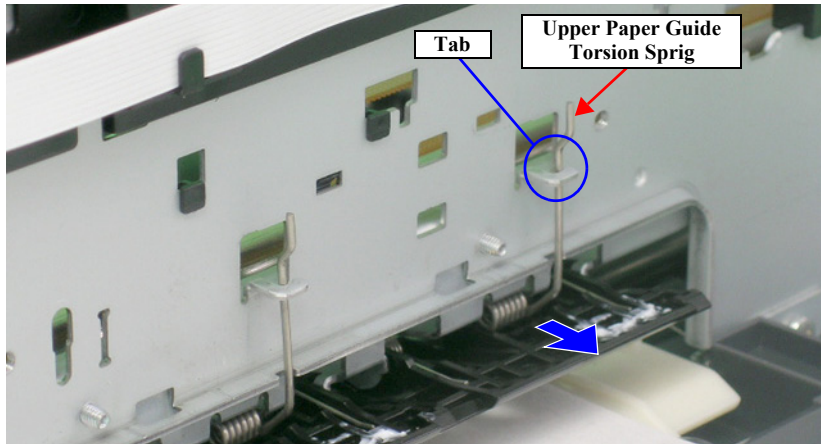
Removing the Upper Paper Guide Torsion Spring
